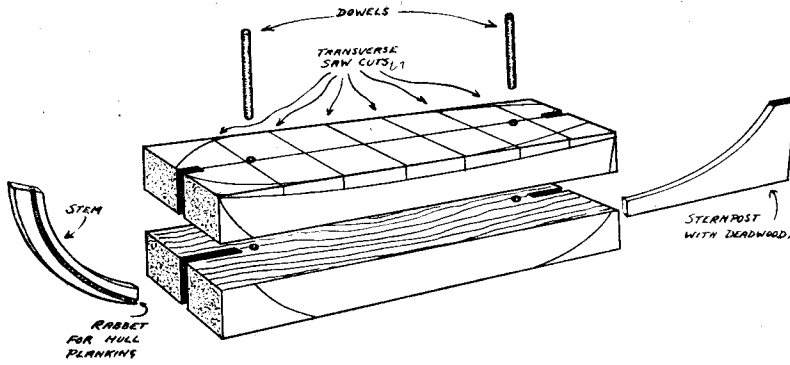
Hull blocks marked out and ready for shaping and hollowing
